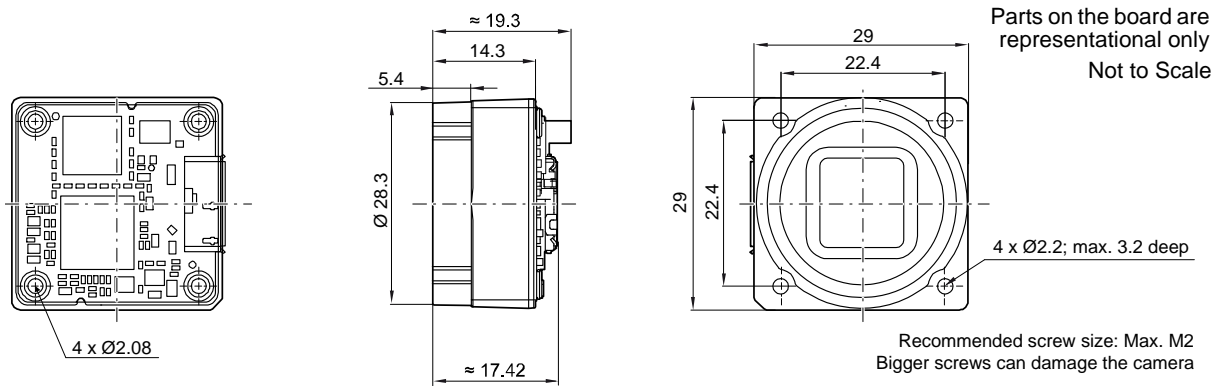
Mechanical Dimensions (in mm) for Cameras with CS-mount Lens Adapter
